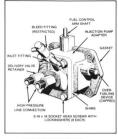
BRYCE/KIKI PUMP AND ADAPTER ASSEMBLY
